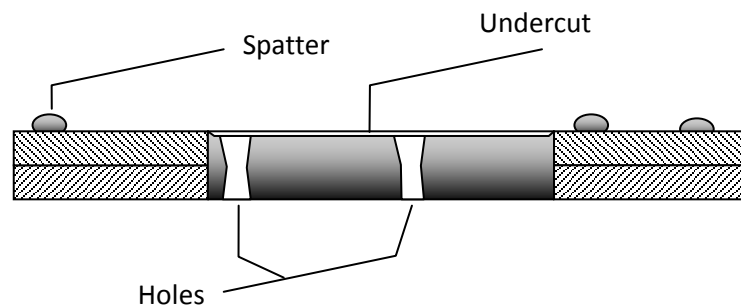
Schematic: longitudinal weld section showing holes and spatter
